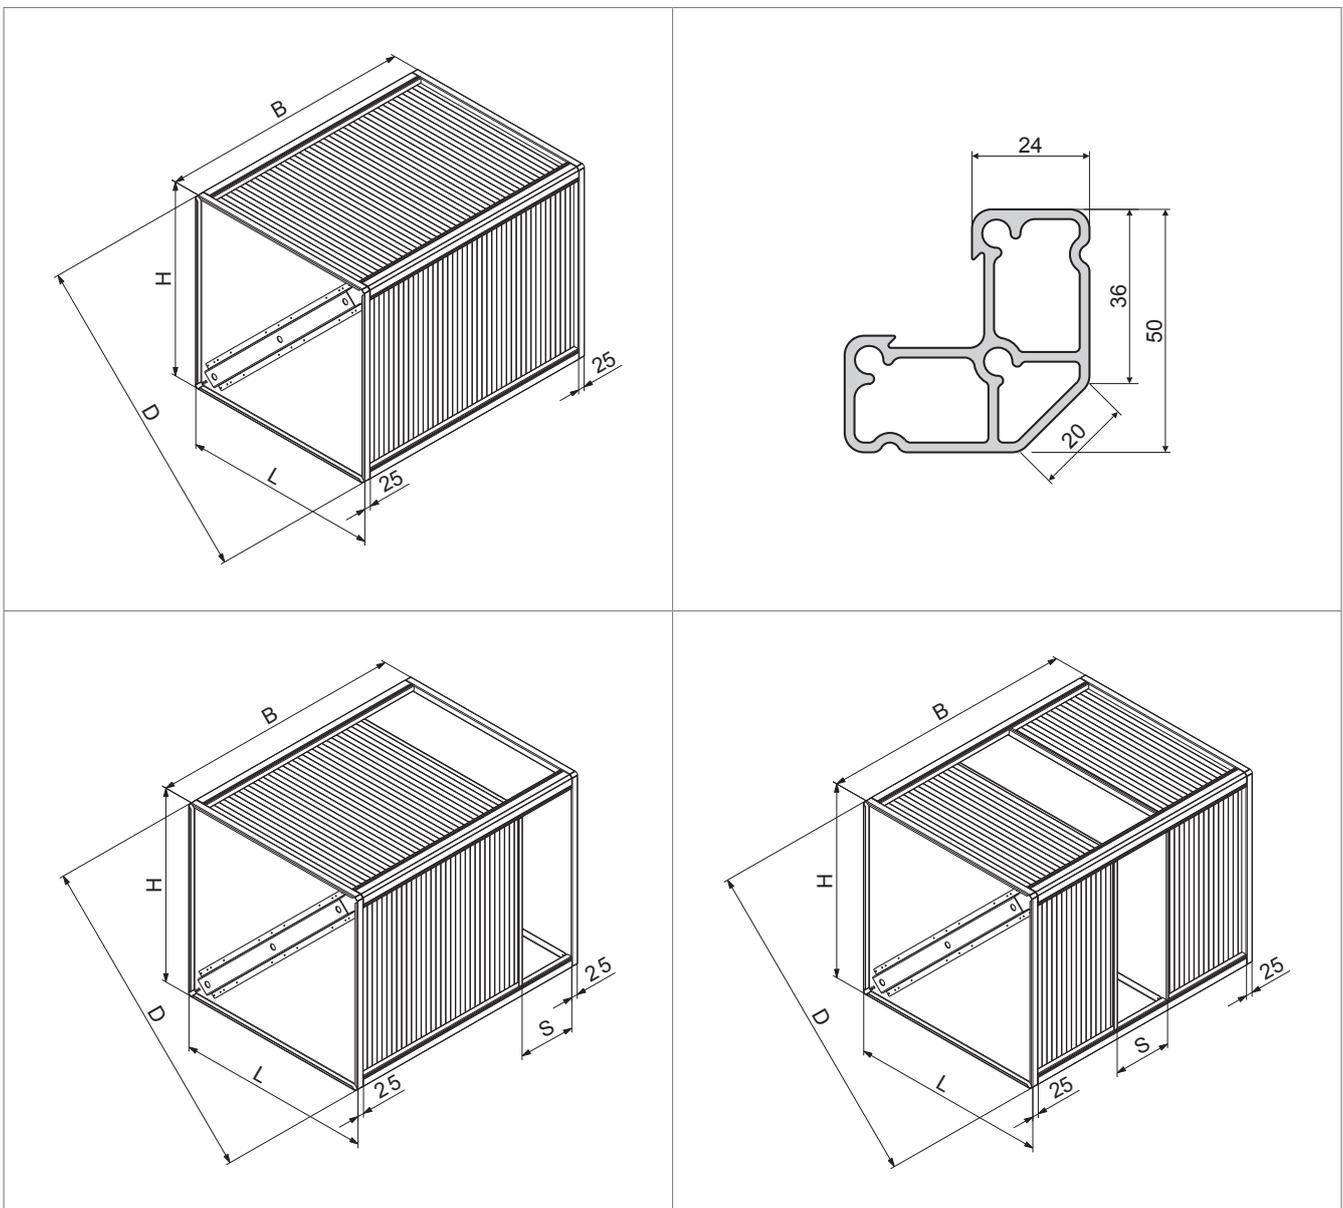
Dimension sheet for design F plate heat exchanger without dampers (dimensions in mm)
